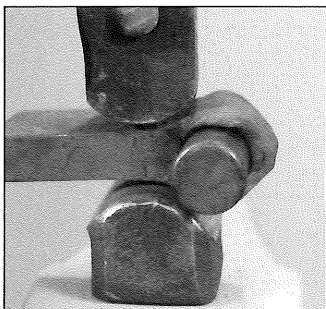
Draw out the throat using top and bottom fullers. Work from both sides
